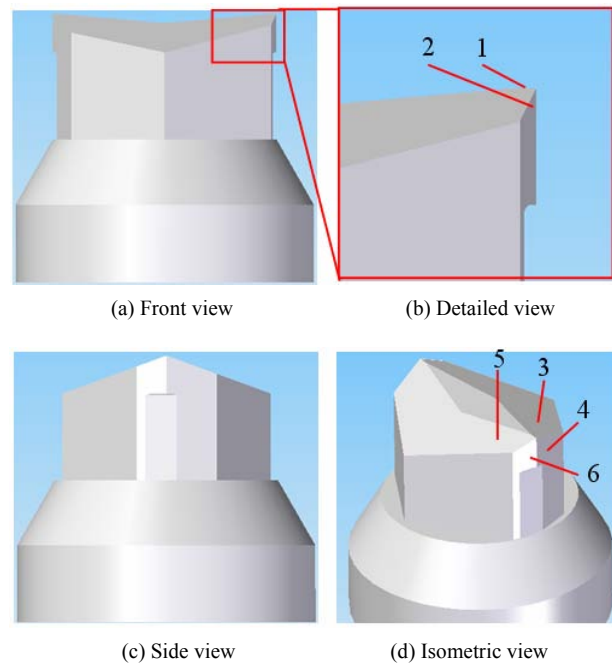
SEE-70 (Straight Edge e Endmill has the negative 70° rake angle). (1) Bottom cutting edge; (2) Side cutting edge; (3) Axial rake face; (4) Radial rake face; (5) Axial clearance face; (6) Radial clearance face.
